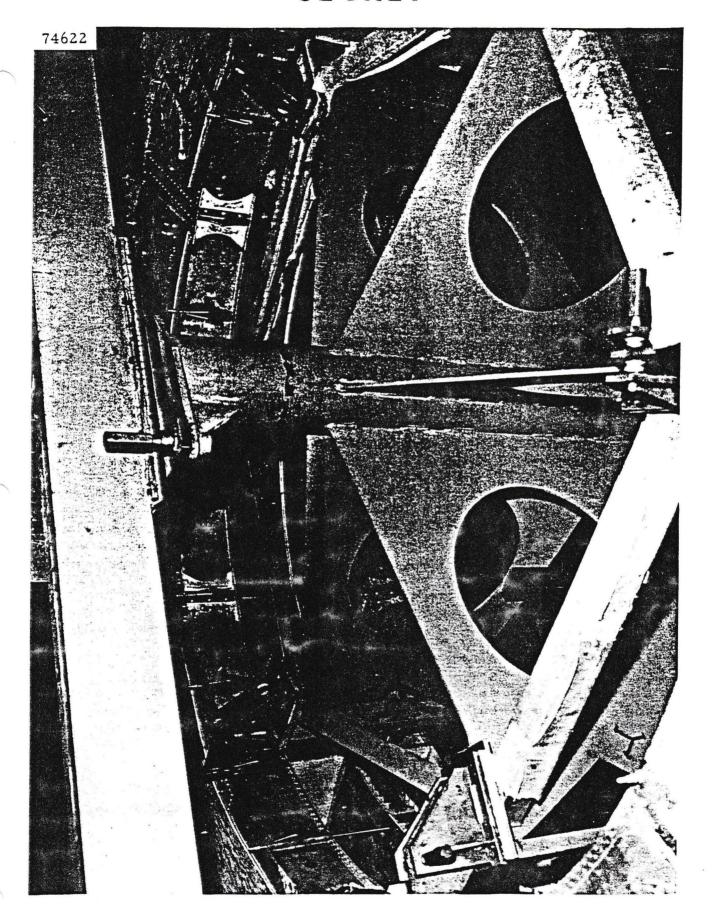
JIG BEAM AND CENTRE LOCATOR - FINAL ASSEMBLY JIG
